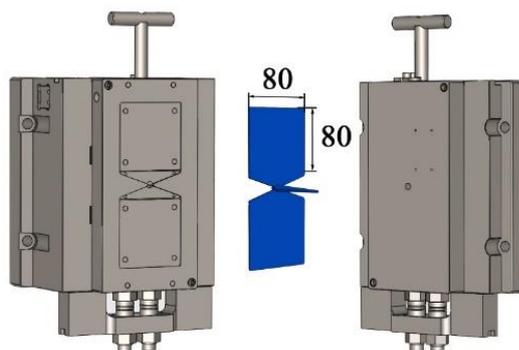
Mold producing flat specimens, and the 3D model of the injection molded product
